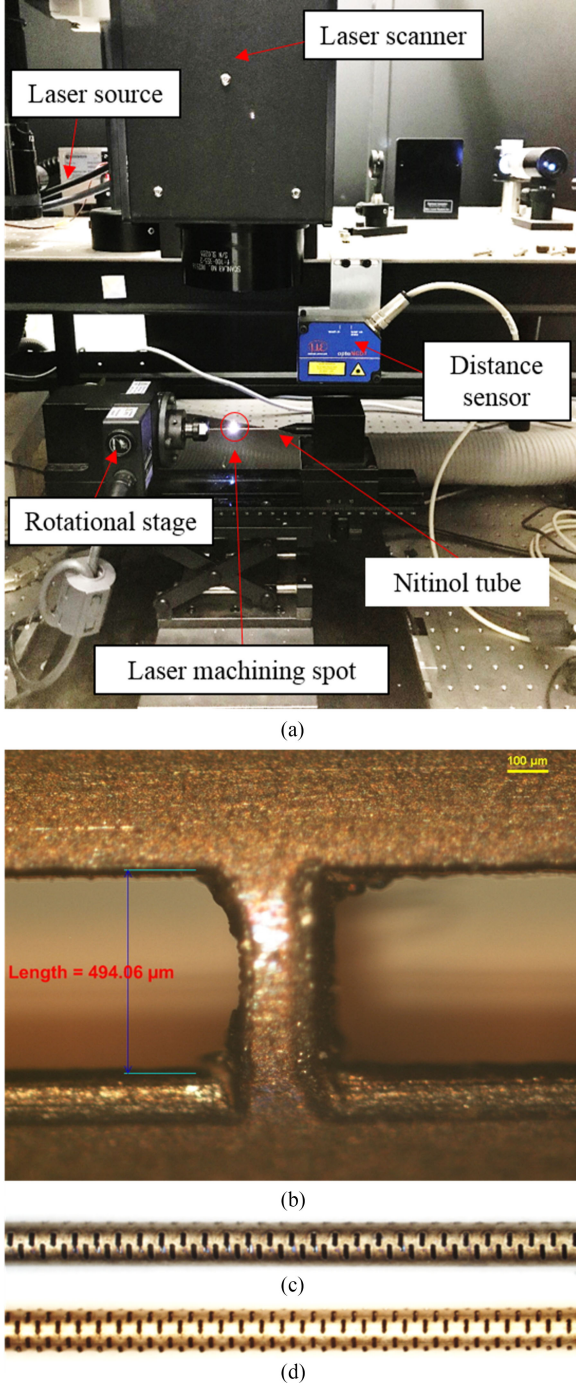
(a) UV laser machining setups. (b) Enlarged image of the engraved tube surface. (c) Laser-patterned nitinol tube for Type A and (d) Type B.
